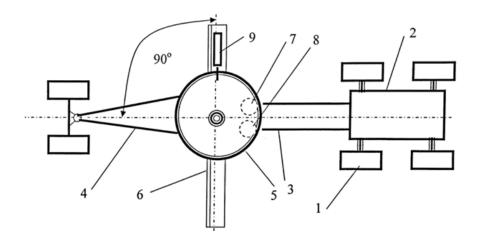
Fastening scheme of the working equipment of the auto grader: 1- propulsion; 2 - podmotornaya frame; 3 - spinal beam; 4 - traction frame; 5 - turn circle; 6 - blade; 7 - hydraulic cylinders for raising / lowering the traction frame; 9 - hydraulic ram traction frame
